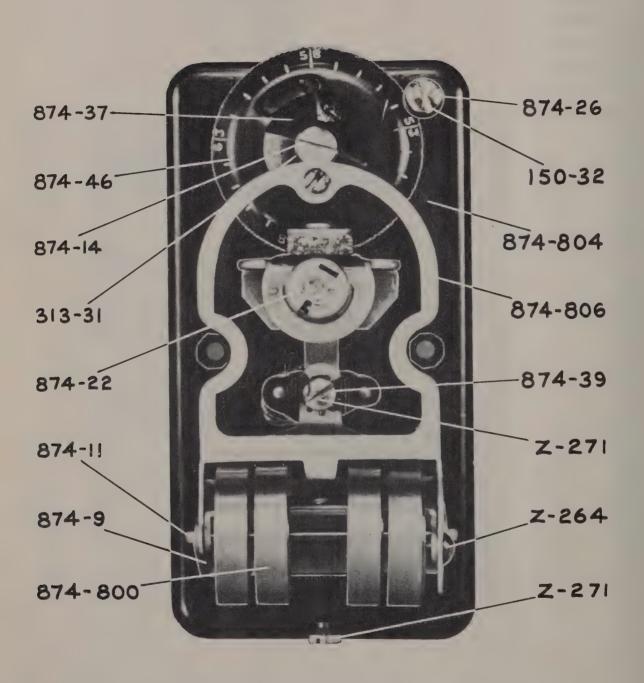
PENN ELECTRIC SWITCH COMPANY THERMOSTAT ASSEMBLY (A2-A)
